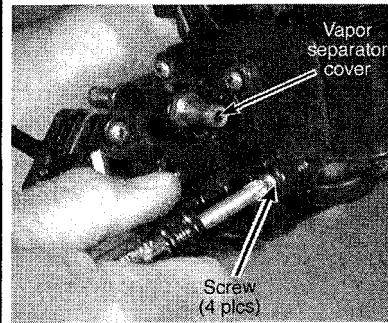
Remove the cover screws, then lift off the vapor separator cover and float assembly
